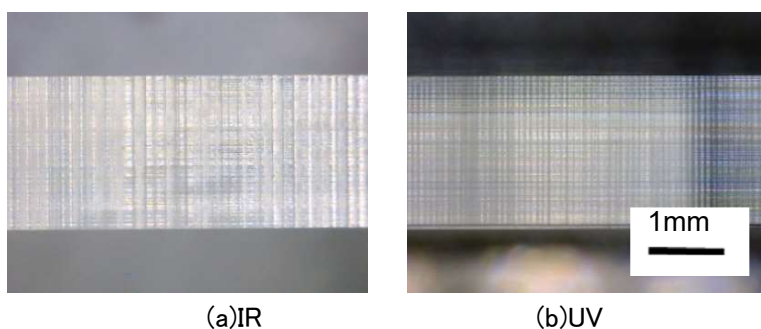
Cutting surface comparison by cutting tool finished using laser.
